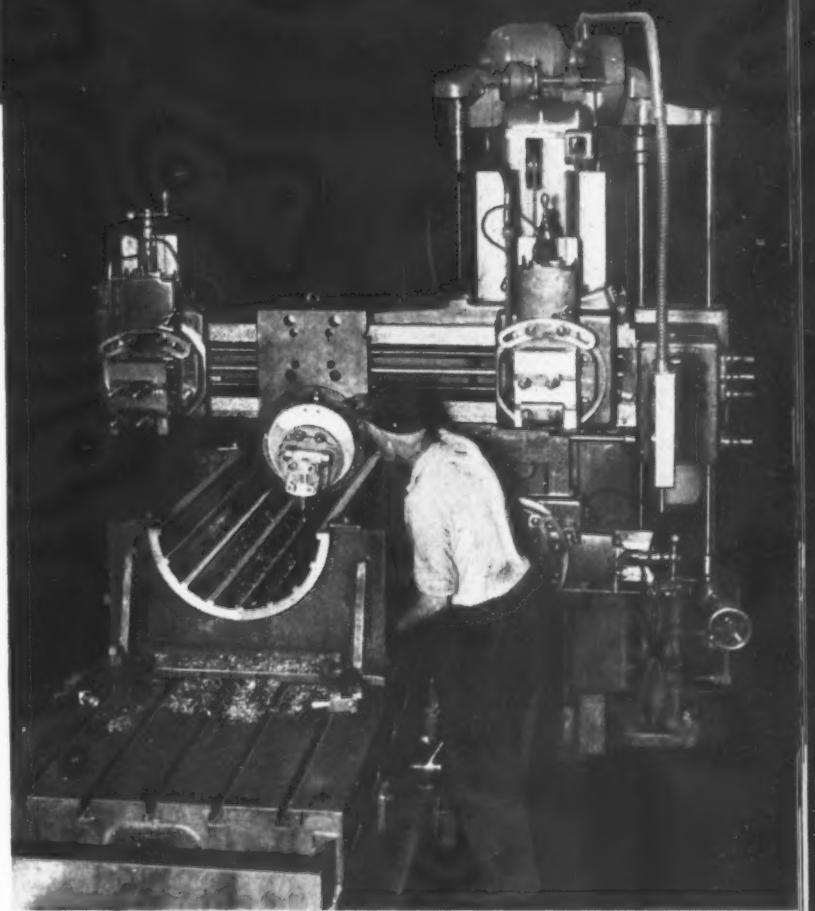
Machining Grooves in a Stern Tube Bearing to Receive Rubber-coated Bronze Bars that Provide the Bearing Surface
